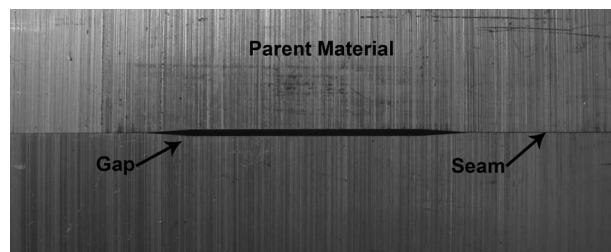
Photo of a 2.0 mm seam gap between plates to be butt welded
